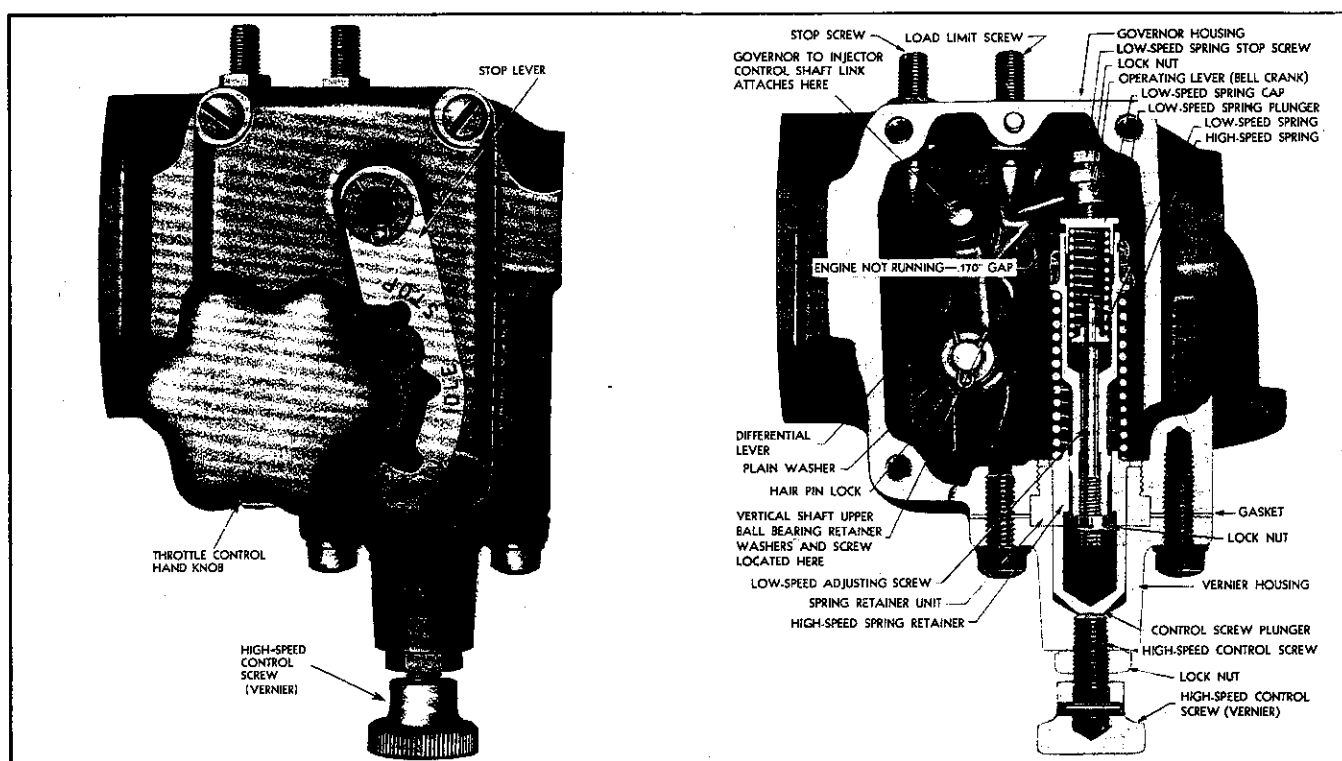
Constant Speed Mechanical Governor Springs, Control and Cover Assembly.
